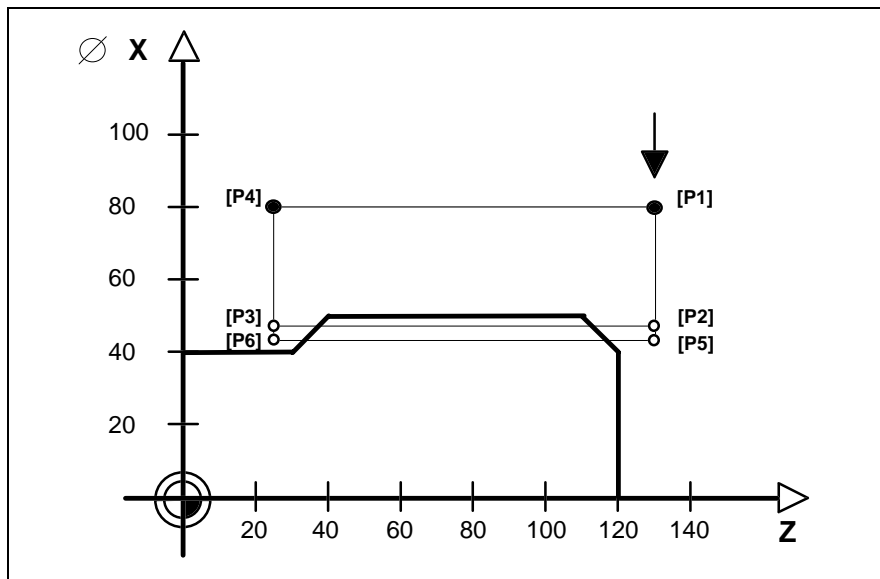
Thread cutting—longitudinal thread with the second spindle
